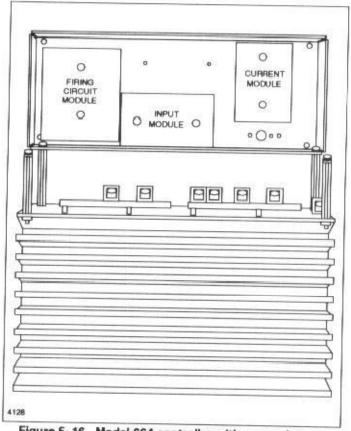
Model 664 controller with cover plate on edge for access to modules.
